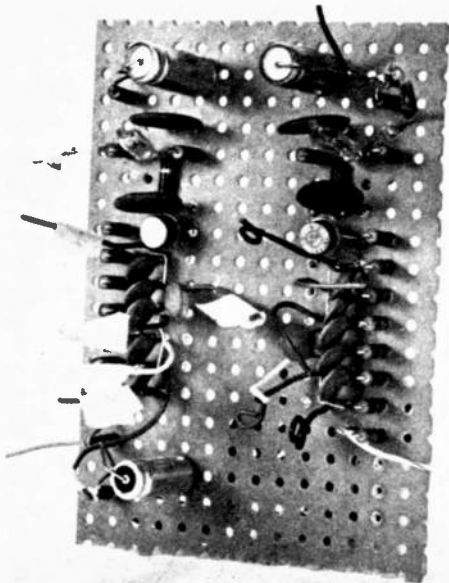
On board built by author, parts are mounted vertically to save space. However, they may be installed as in Fig. 3 to simplify wiring.
